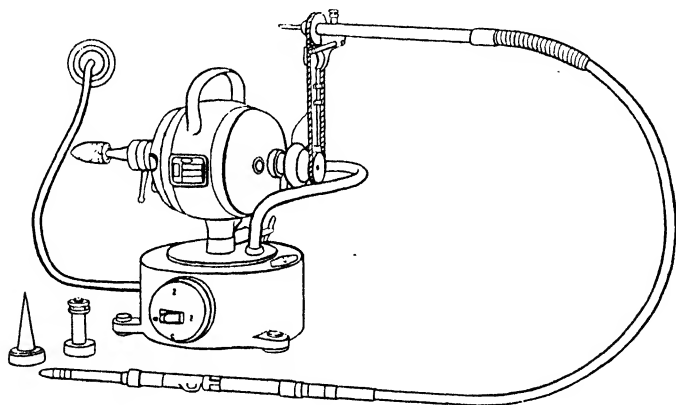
Modern equipment with stationary motor adjustable for three speeds; one end of the spindle supports the engraving tool in a chuck, the other end drives the flexible shaft
